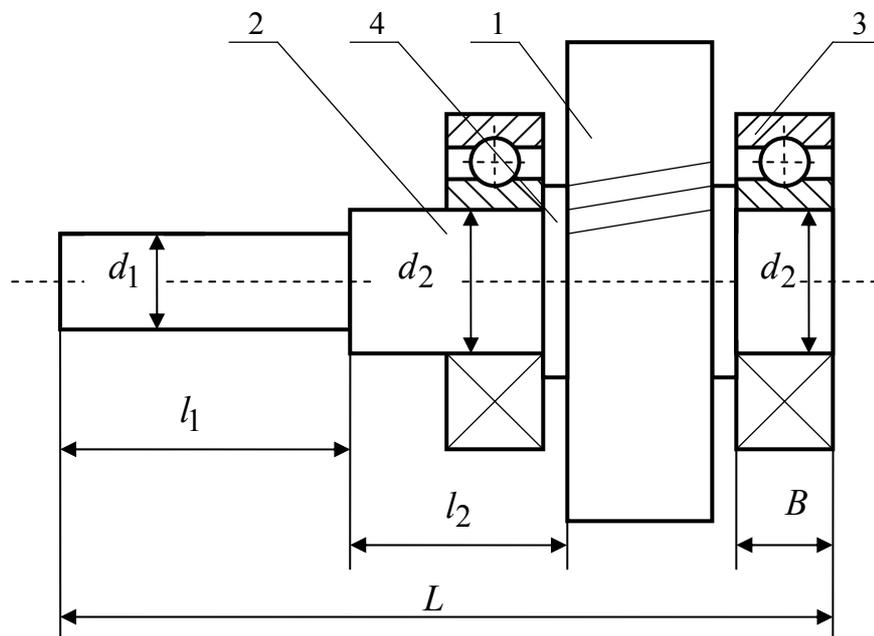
Mechanical gear assembly unit: 1 — gear, 2 — shaft, 3 — shaft bearings (rolling bearings), 4 spacer sleeve
